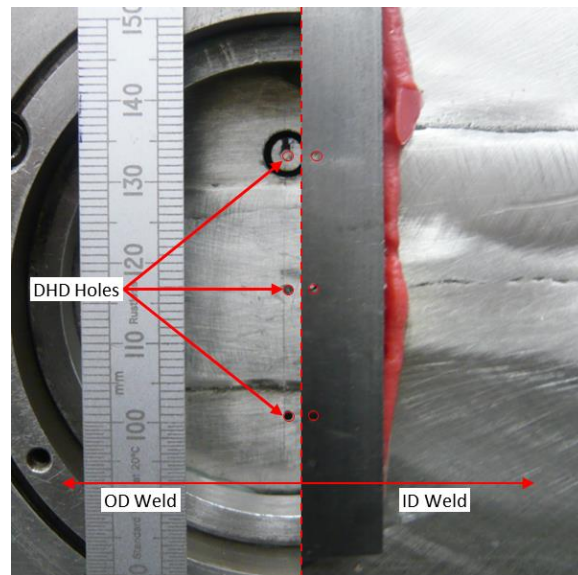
iDHD holes associated with the weld repair. OD is on the left and ID on the right. The holes suggested significant misalignment, though weld cross sections indicate that the final pass on the OD weld is likely causing the perceived asymmetry.
